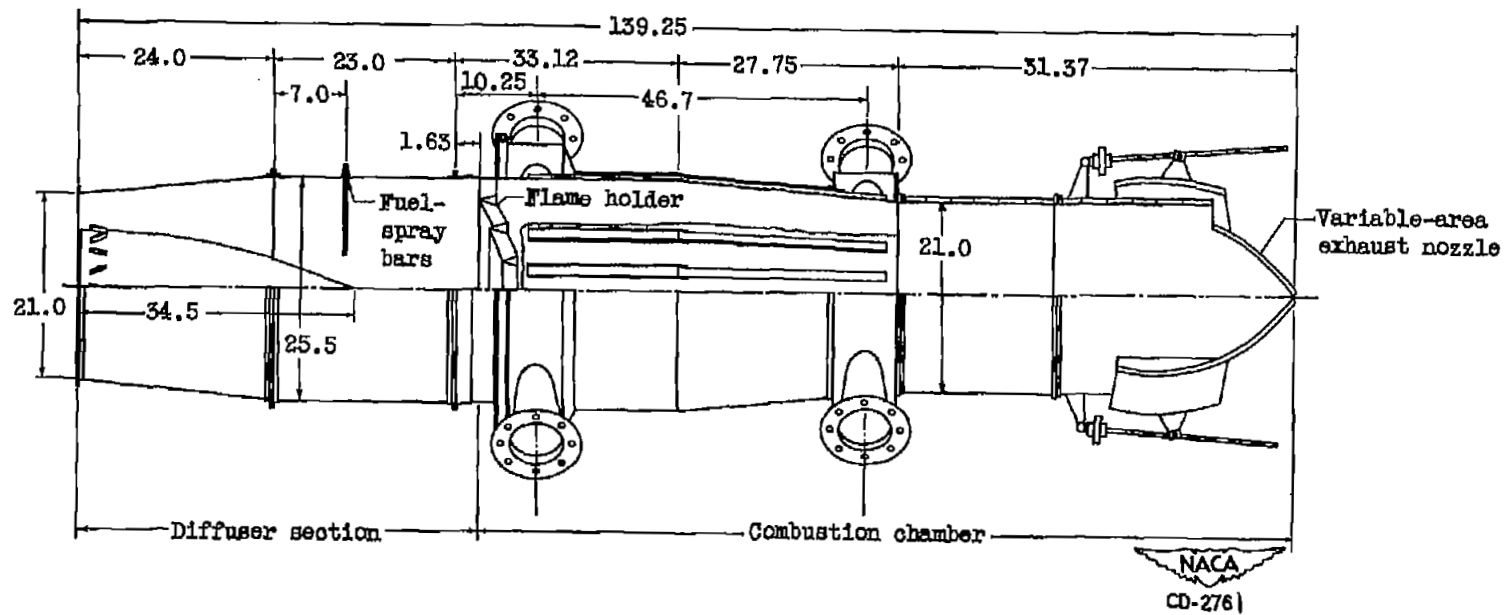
Sectional view of afterburner. (All dimensions are in inches.)
